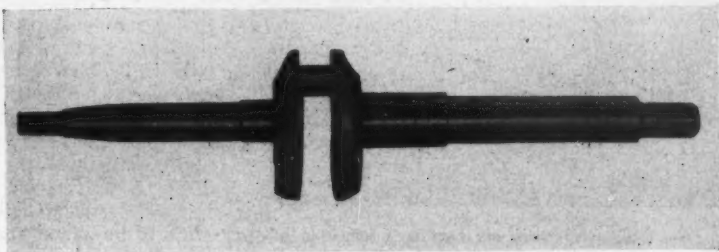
Two journal bearings also the crankpin bearing of this pearlitic malleable iron crankshaft are hardened by induction heating in a 2-station fixture
